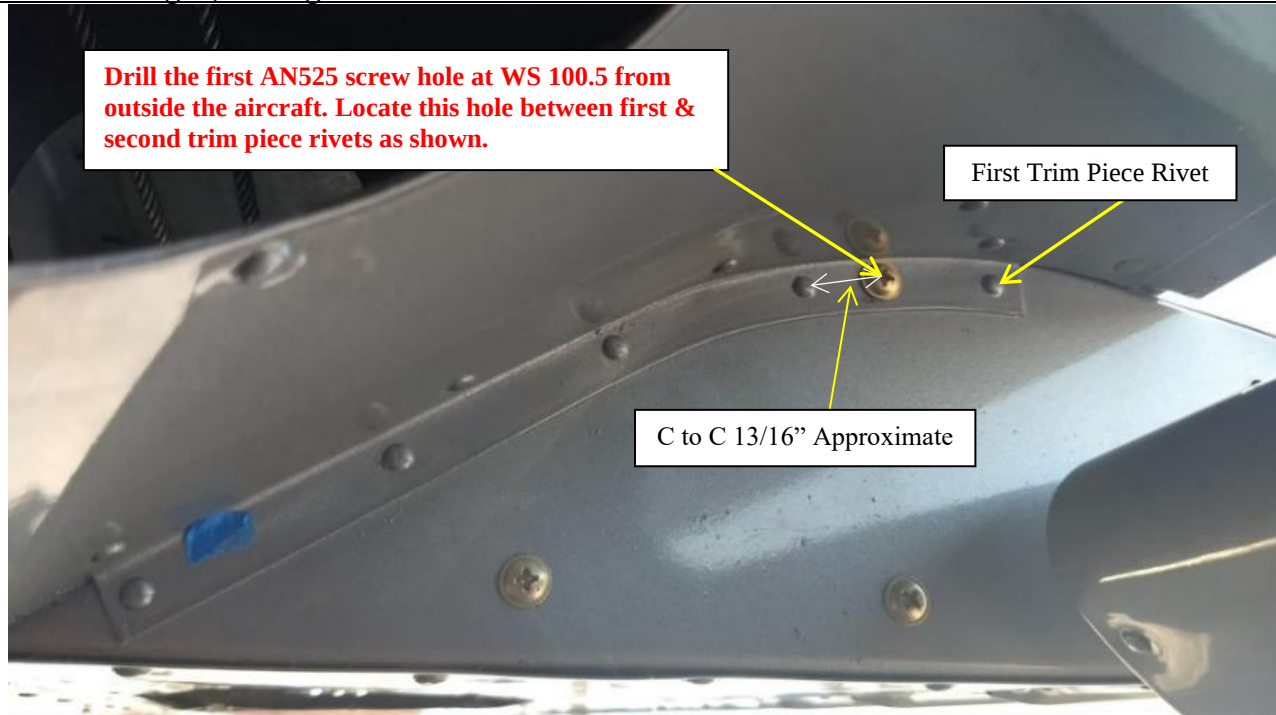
ROLL SERVO & MOUNTING PLATE INSTALLATION
